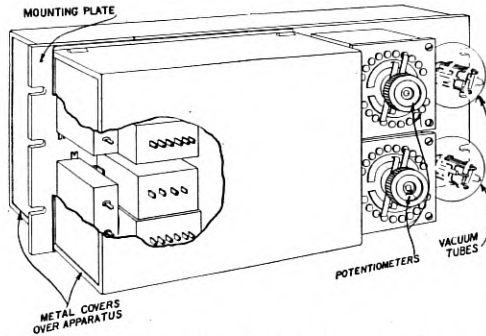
Typical Assembly of Panel Mounted Repeater Set
